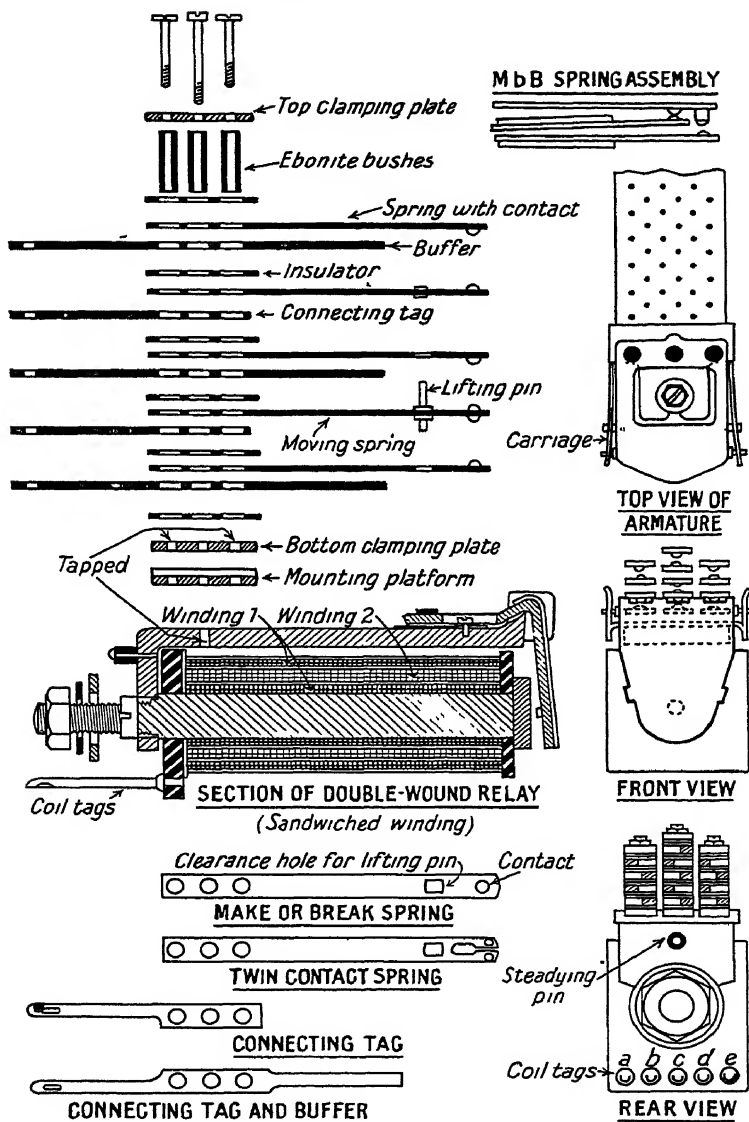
SIEMENS AUTO-TYPE RELAY ASSEMBLY
